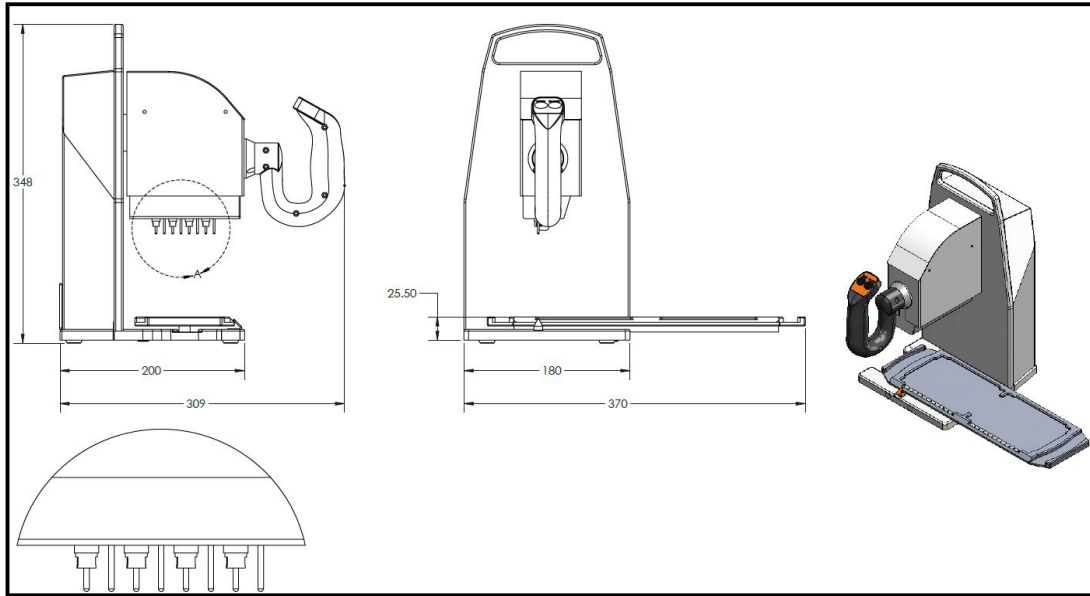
Semi-Automated Screw Cap Decapper 8 Dimensions
